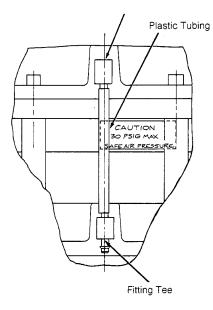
MK-8XXX Actuator Cutaway (MX-88XX Shown).
